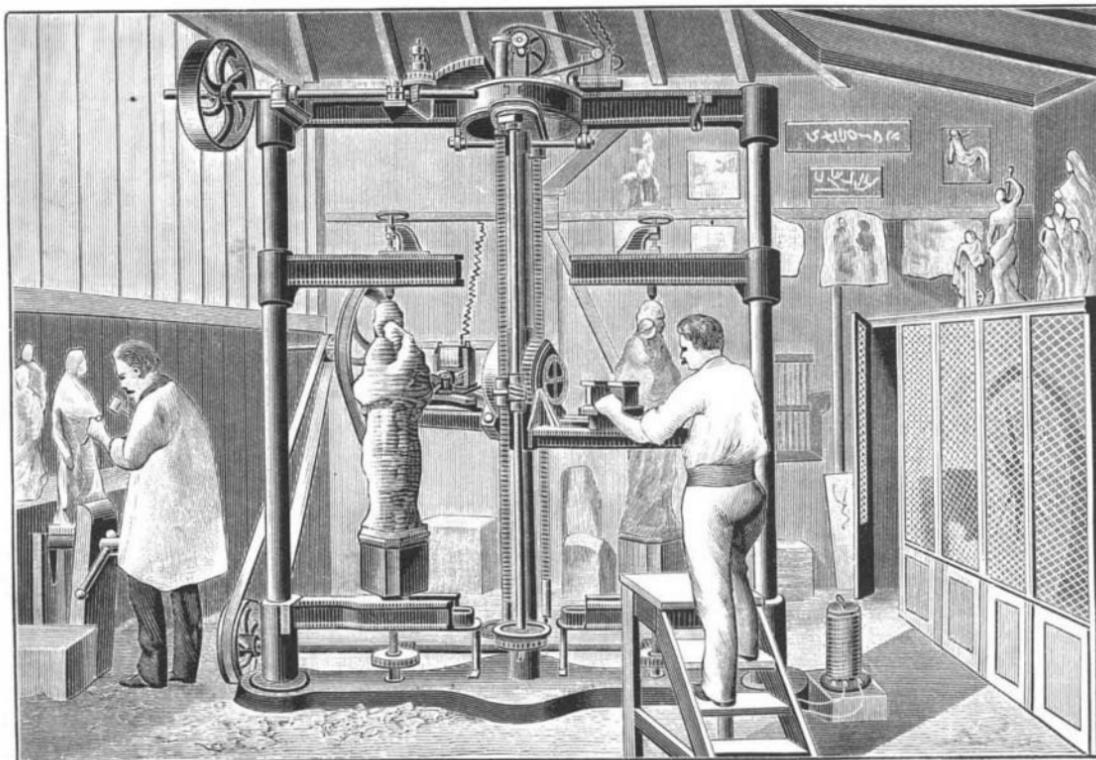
AUTOMATIC SCULPTURING MACHINE.
